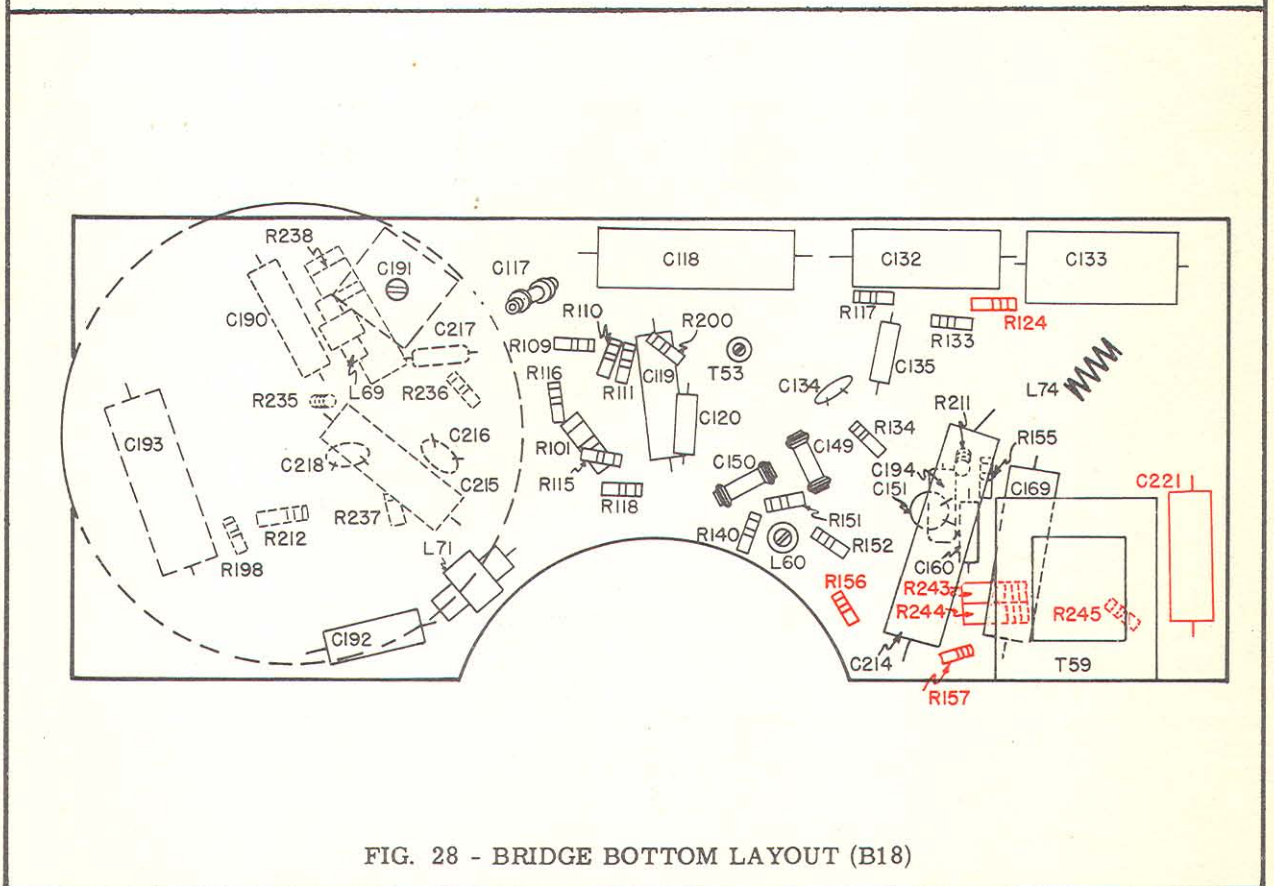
BRIDGE BOTTOM LAYOUT (B18)
